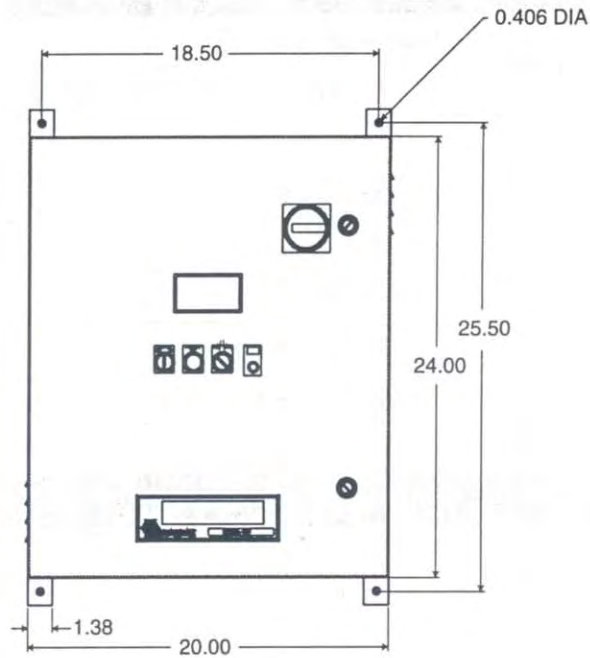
shows the mounting dimensions using the supplied brackets.
